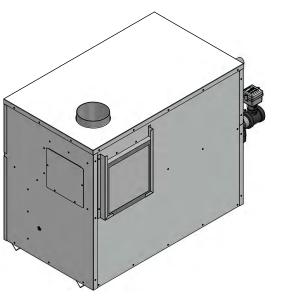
Metal Panel Covering Side Combustion Air Inlet
